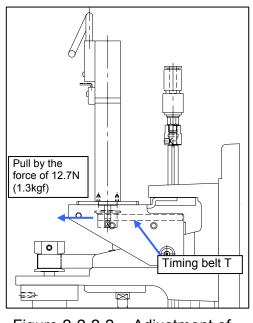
Adjustment of the θ-motor Belt Tension
